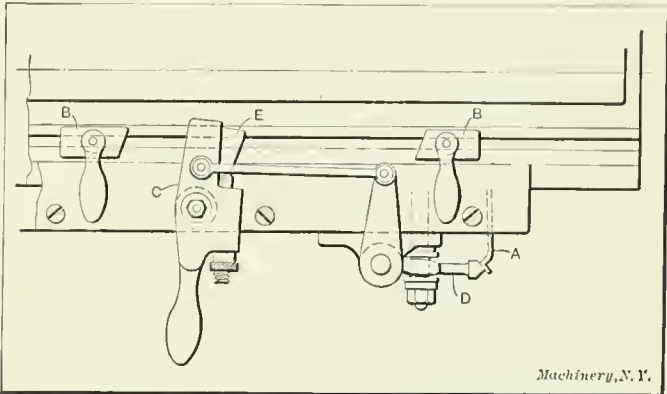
Spring Locking Arrangement for the Shaper-reversing Mechanism
